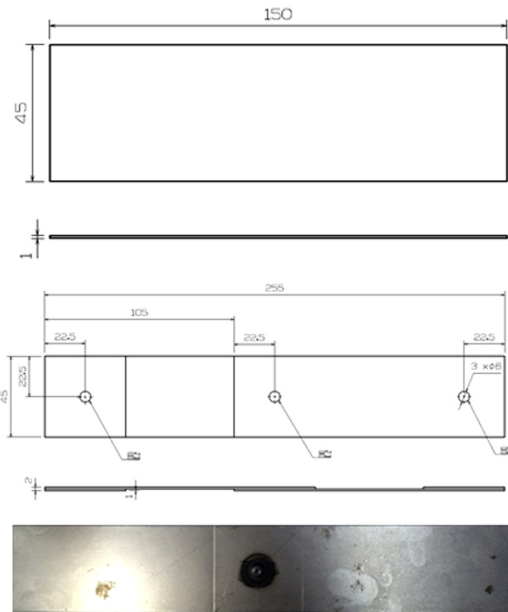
Shear tension specimen for spot and plug welding
